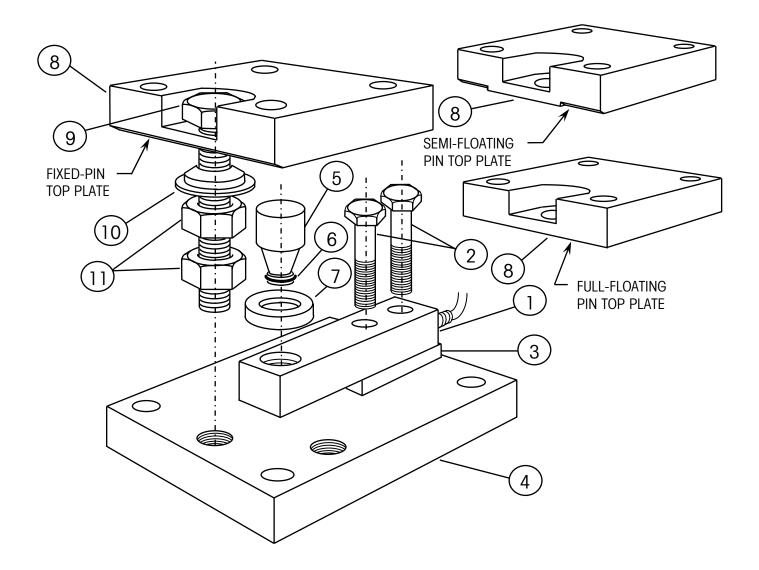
250-lb to 45,000-lb FLEXMOUNT Assembly
